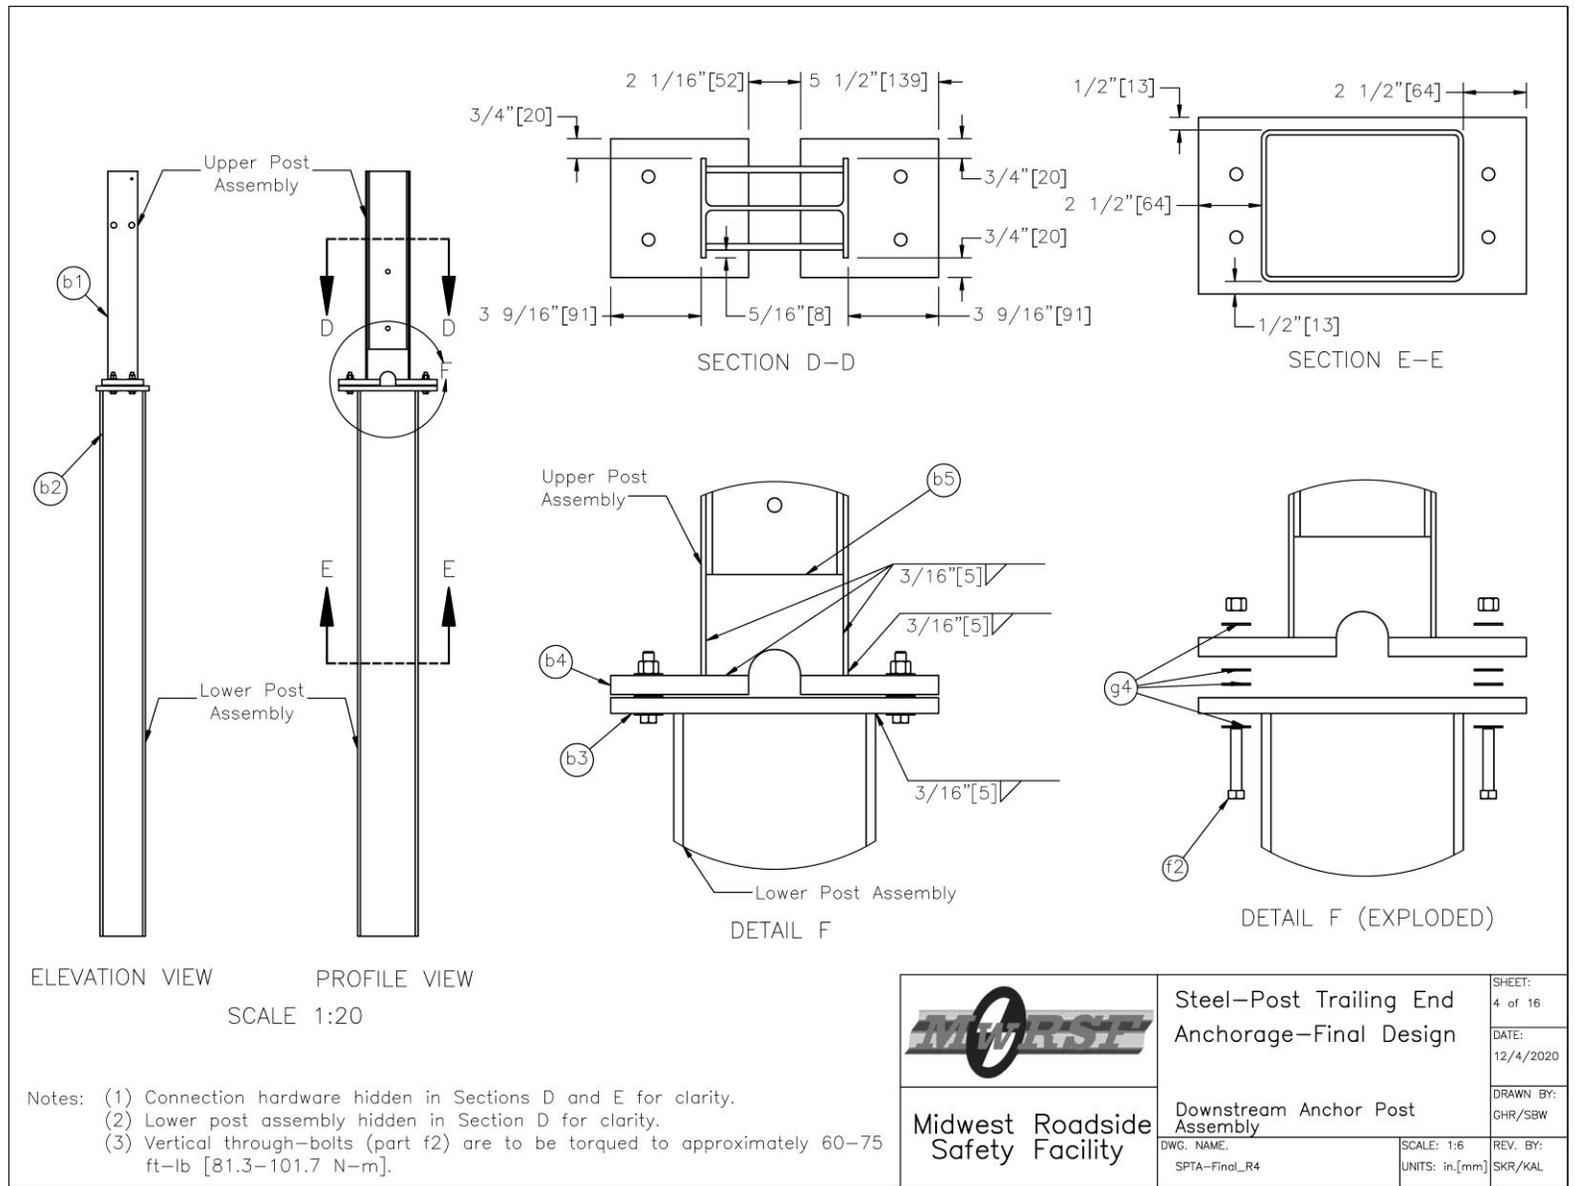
Steel-Post Trailing End Anchorage, Downstream Anchor Post Assembly
